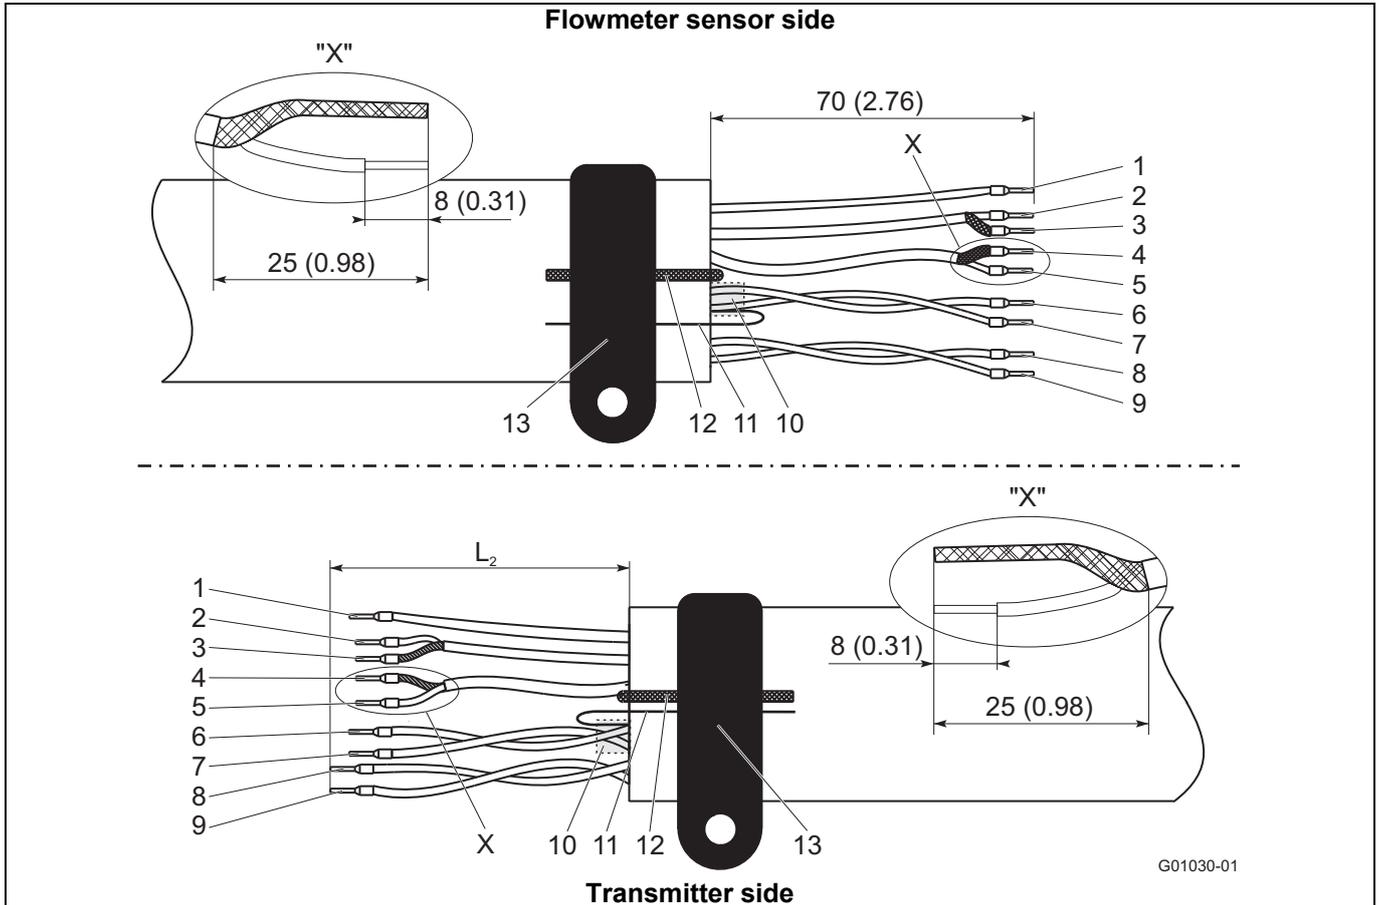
Flowmeter sensor side, dimensions in mm (inch)
